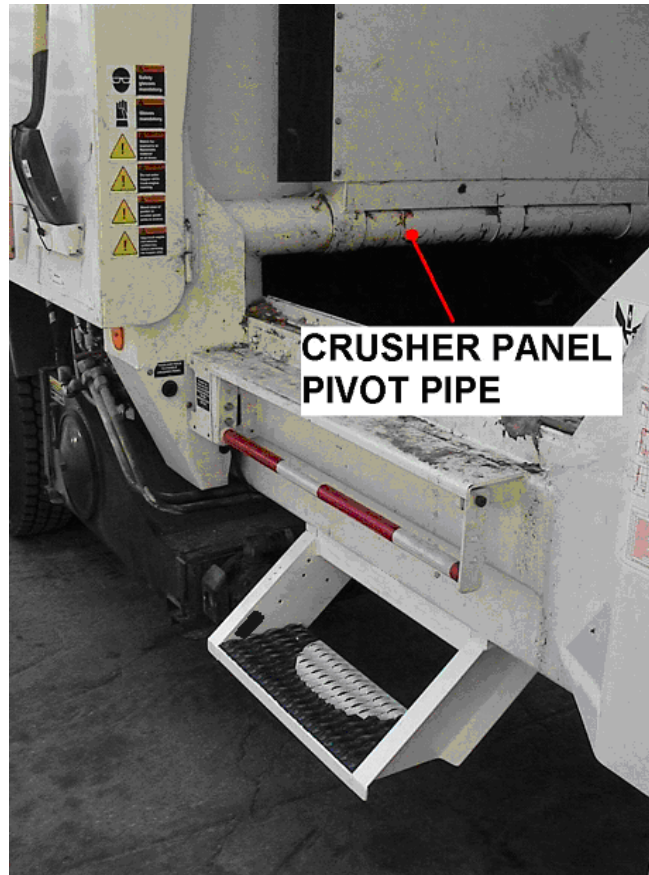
Crusher Panel Pivot Pipe used as an Electrical Conduit
